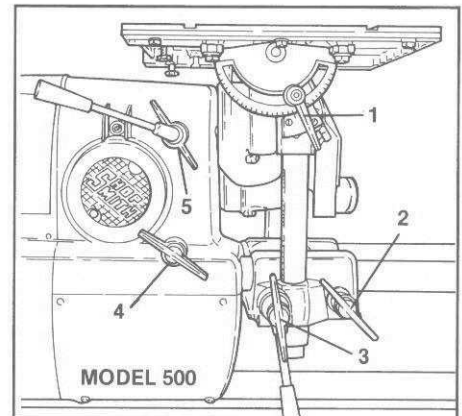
Before turning on the Mark V, go through a five-point check. Make a clockwise sweep with your hand, checking the table tilt lock (1), carriage lock (2), table height lock (3), power plant lock (4), and quill lock (5).
